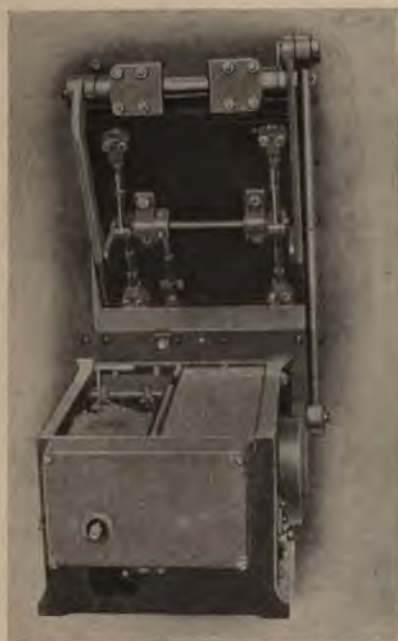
Hatch gear. View looking up beneath the protective deck showing hatch plate partly open.
